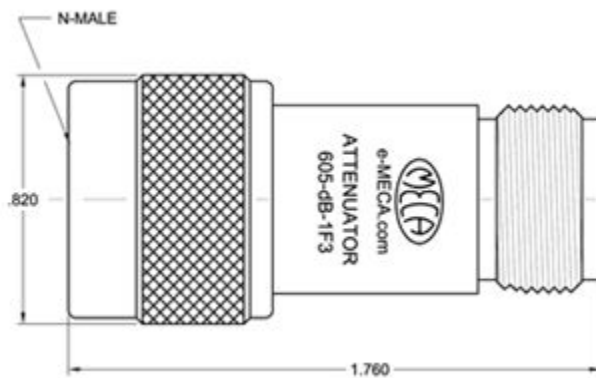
Attenuator Detail View Showing a Standard N-Type Plug and Jack
